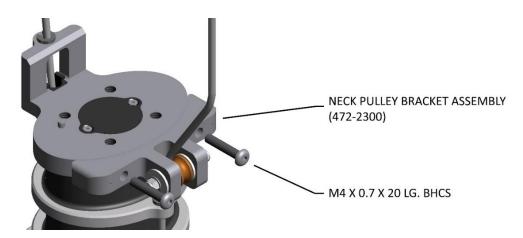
Secure the Neck Pulley Bracket Assembly
